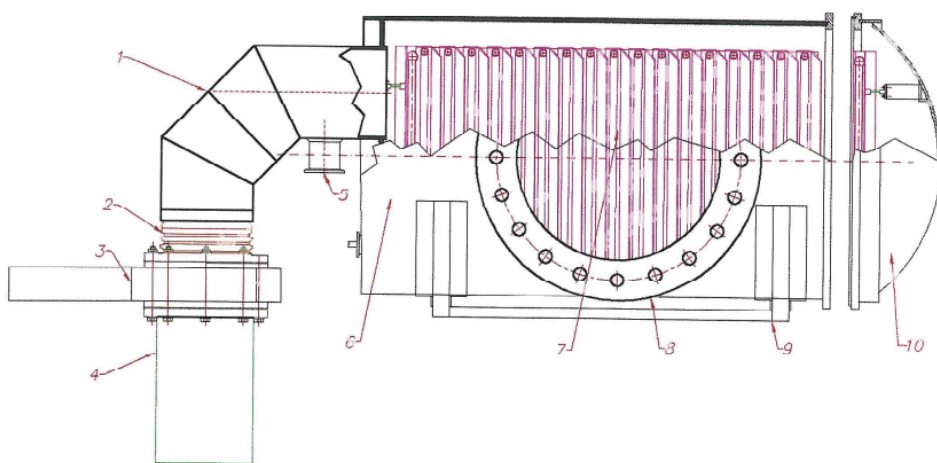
Computational layout diagram of the Prototype vacuum chamber: (1) high-vacuum outlet; (2) vibration decoupling; (3) vacuum seal; (4) high-vacuum pump; (5) fitting for connecting the shutter of the fore line pump; (6) body of vacuum chamber; (7) cryogenic shroud; (8) optical feedthrough for inputting radiation from the Solar simulator; (9) lodgements and connections for camera mounting; (10) removable front cover.
